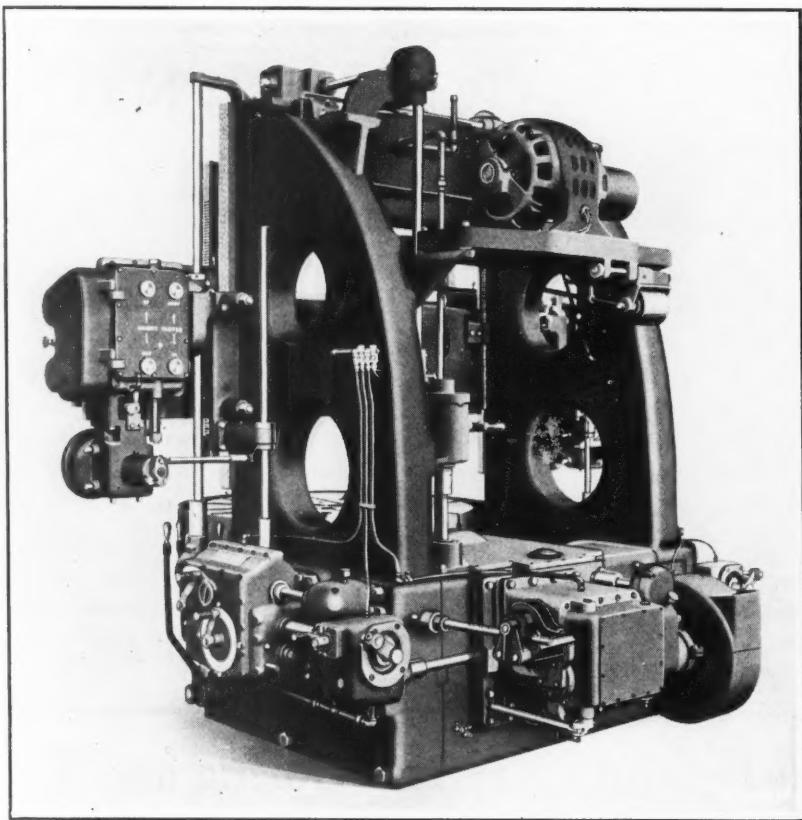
Rear View of the Colburn Heavy-duty Boring and Turning Mill
